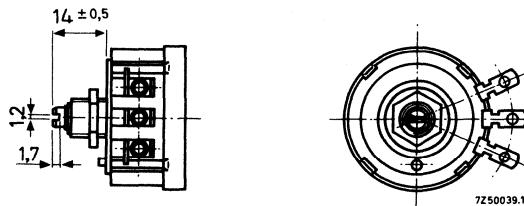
Potentiometer with spindle with screwdriver slot. Dimensions are identical to those in Fig. 1 except as shown.
